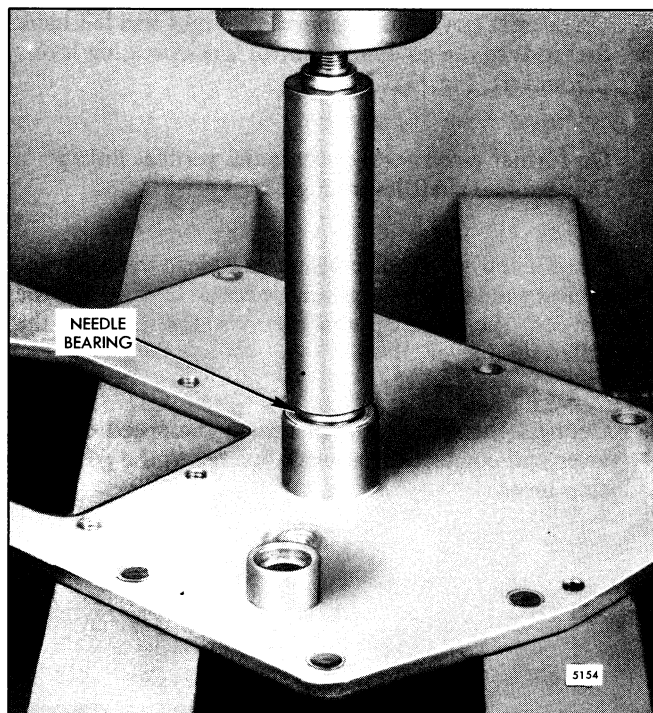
Installing Needle Bearings In Governor Cover using Tool J 21068
